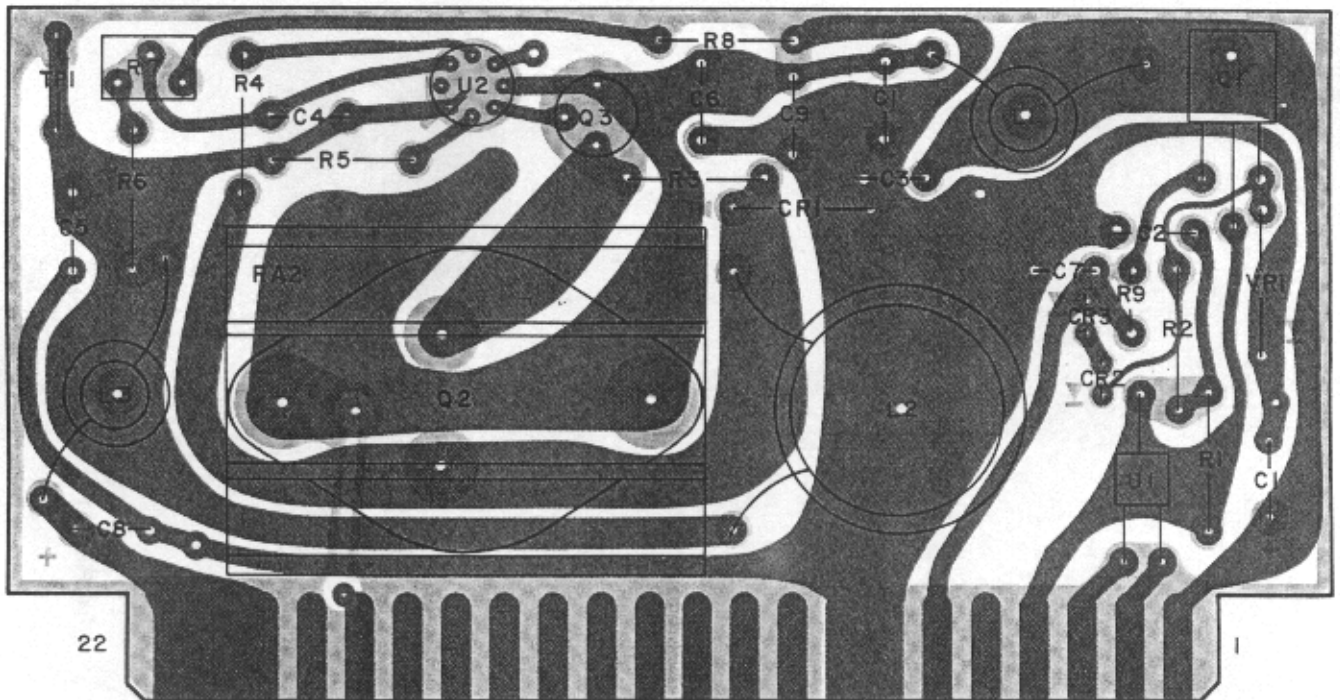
Type 76209 Switching Regulator (A27), Location of Components
